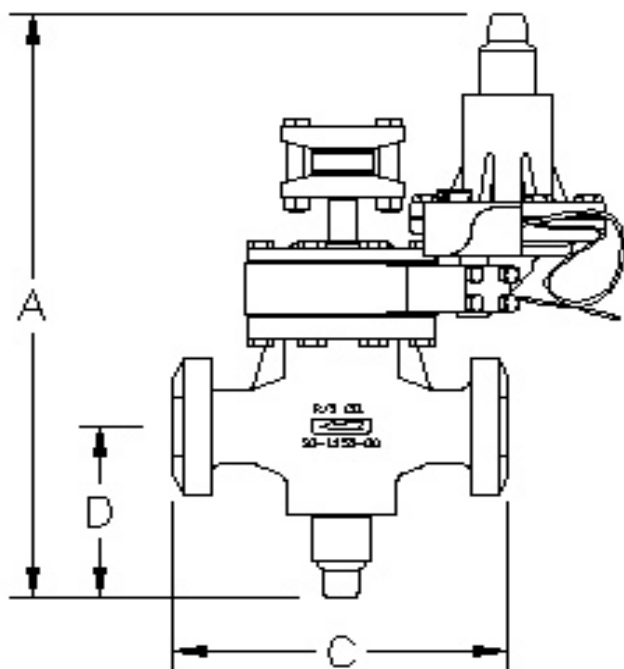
CK-5 1-1/4" and 4" Port Size Dimensions
